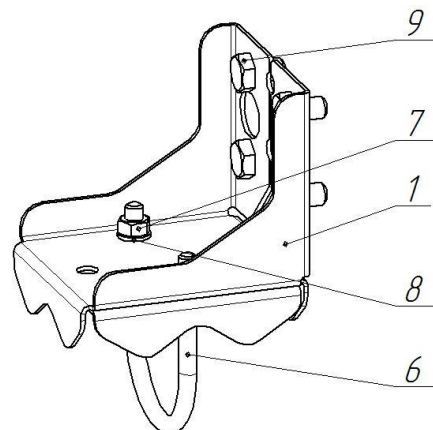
Stainless corner bracket. Mounting kit type 2
